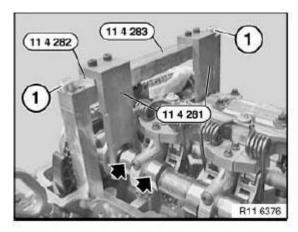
Securing Special Tool 11 4 283 To Cylinder Head With Bolts Courtesy of BMW OF NORTH AMERICA, INC.
